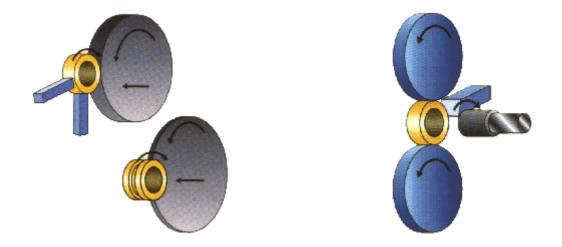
Bearing outer ring grinding and grooving method Source : SKF Bearing Sdn. Bhd.
